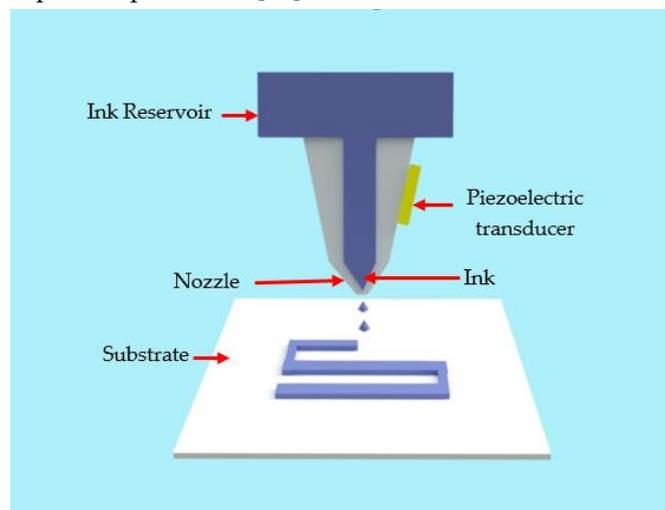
Schematic illustration of main parts of Inkjet printing machine.
